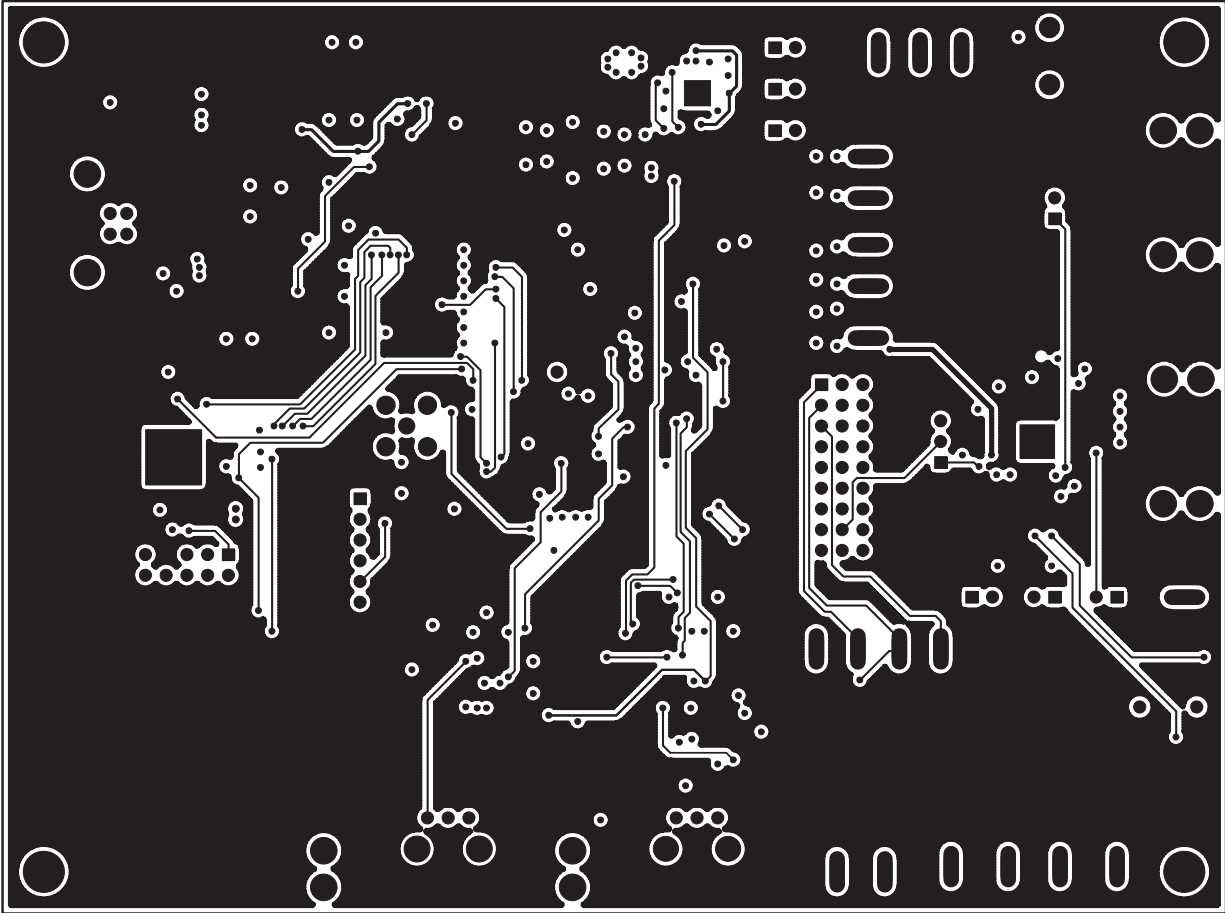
MAX9856 EV Kit PCB Layout—Solder Side
